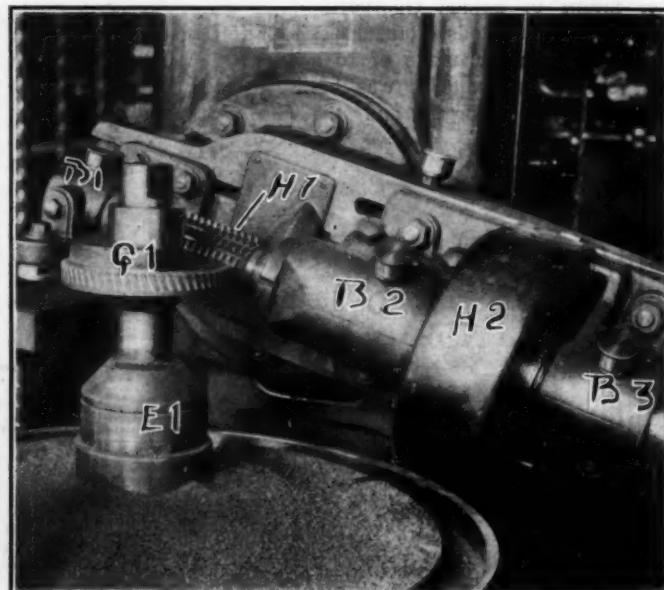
Hobbing machine working on the balancing gear of a Brush Runabout motor, showing continuous cutting operation
